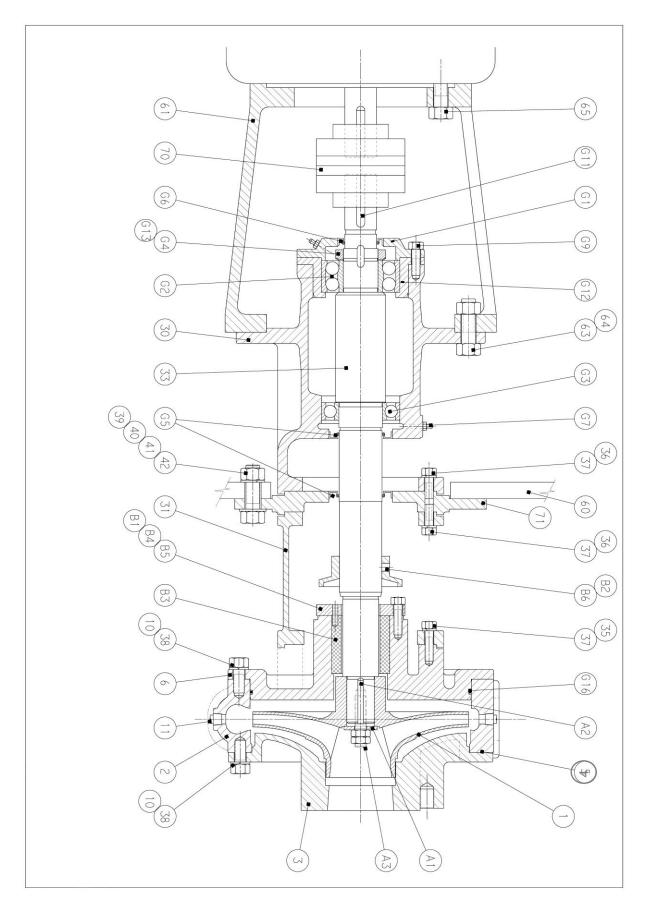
4x5x11 Booster Pump Cut Away 1530 Frame Composite Throttle Bushing
